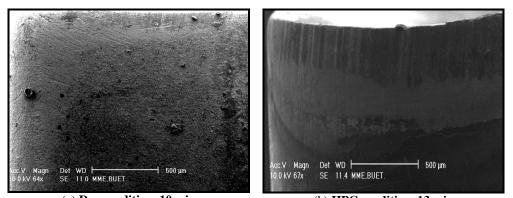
SEM views of principal flank of worn out tip of SNMM insert after machining AISI 4320 steel
